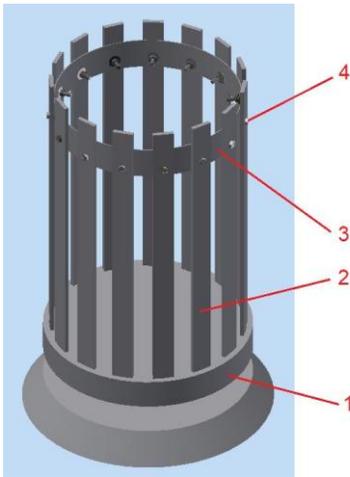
The basket for garbage, 1 – basket base, 2 – lath, 3 – iron ring, 4 – bolt, washer, nut
